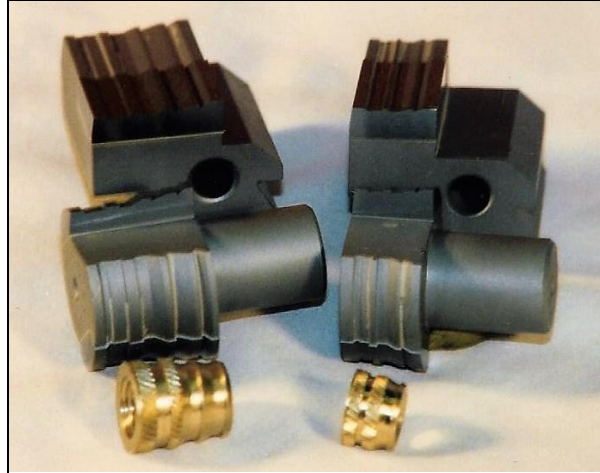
Carbide insert tool holders and High Speed Steel circular tools.
